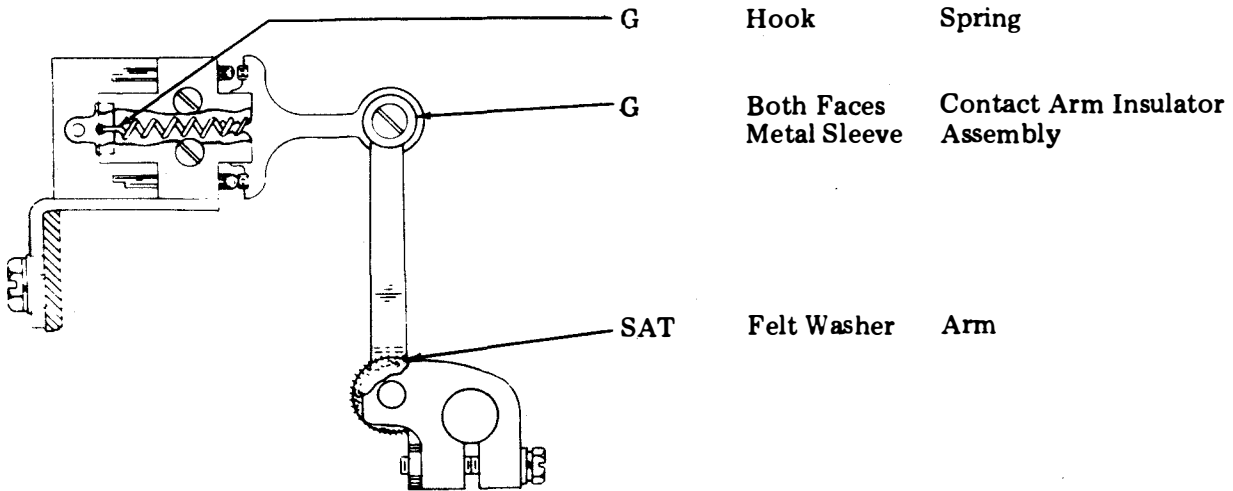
Universal Contact Selector Mechanism, Right Side View
